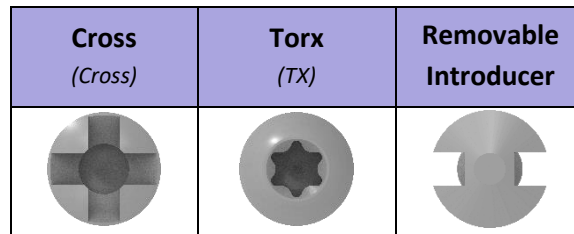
Type of Screw Heads – Cross, Torx (TX), and Removable Introducer
